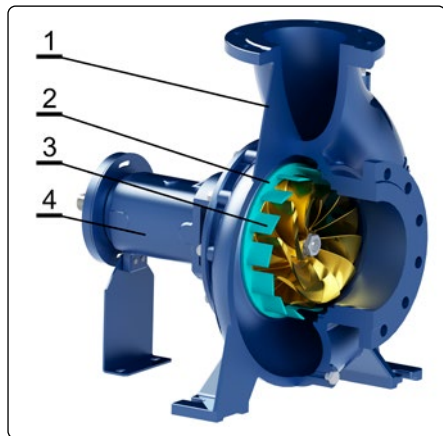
Miniturbine THVfc (1 – pump casing to PN-EN Standard 733, 2 – stay vanes, 3 – Francis runner, 4 – standard bearing housing)
